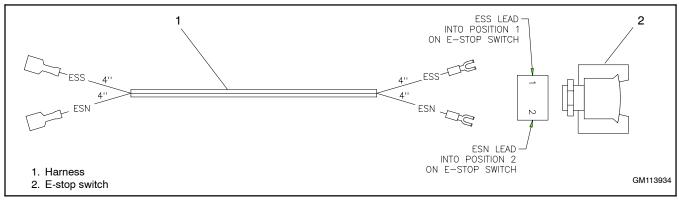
E-Stop Harness Assembly GM113934 or GM115032 (for RCL models)
